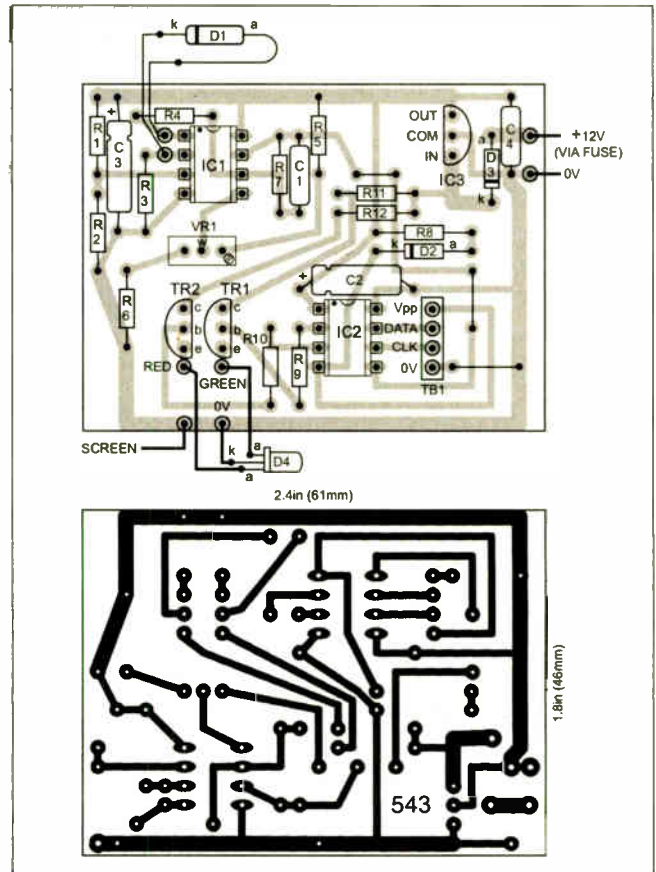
Frost Box Mk2 printed circuit board component layout, wiring and full-size copperfoil master pattern
